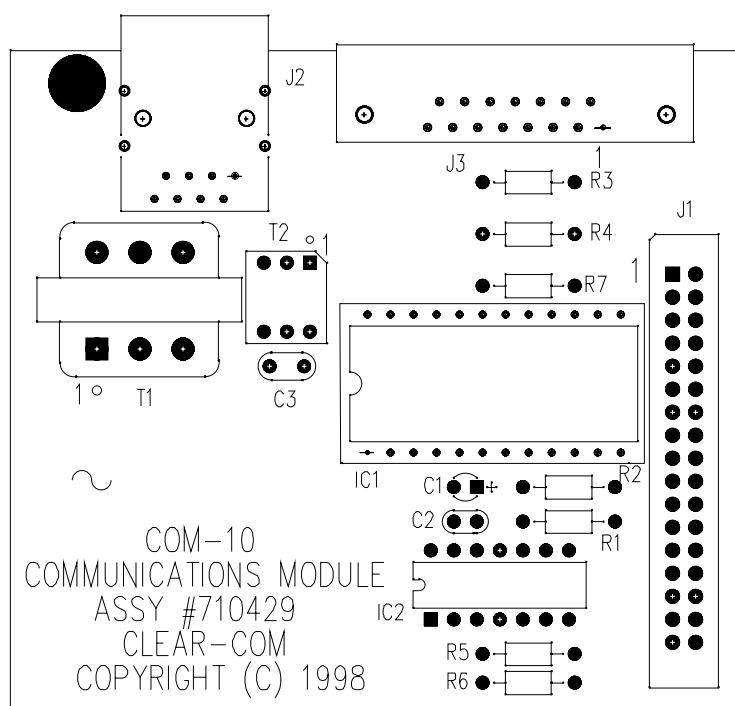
Assembly Drawing - COM-10 Communications Module Rev. A
